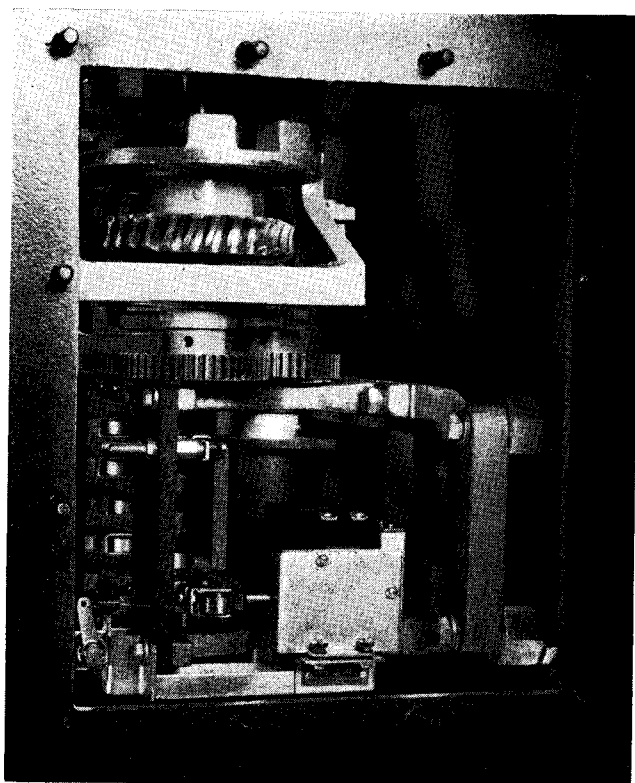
"DynAC Brake" As Installed on URS Cam Switch Assembly
